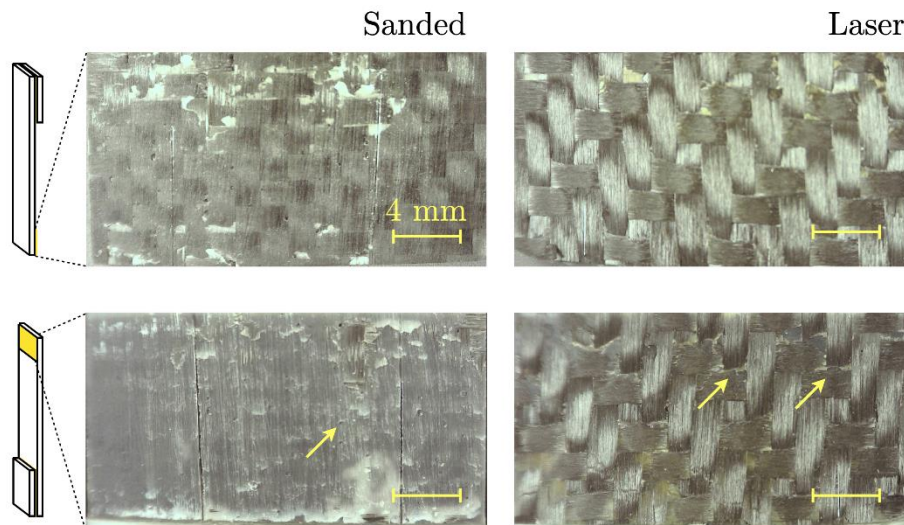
Fracture surface of sanded and laser-treated specimens.
